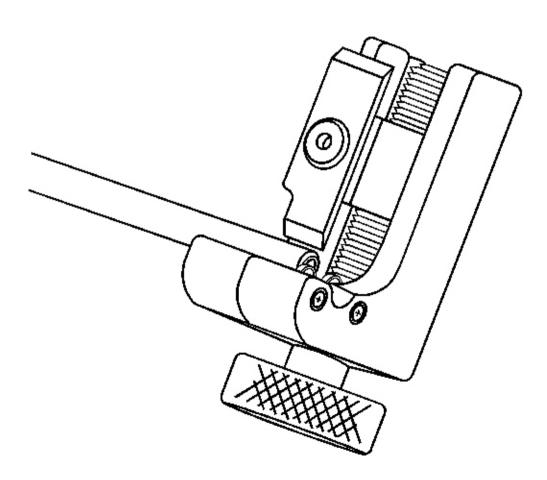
Stripping Nylon Coating From Brake Pipe Ends
